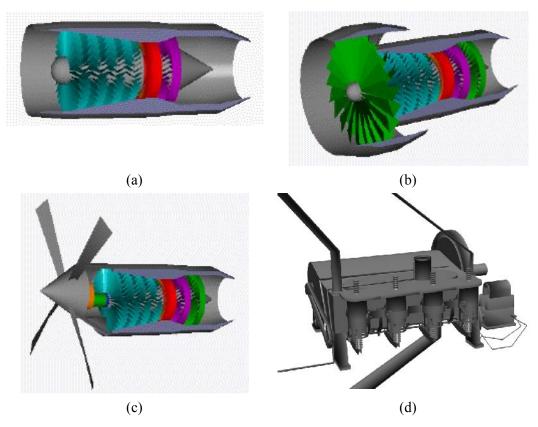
Aircraft engine types (a) turbojet, (b) turbofan, (c) turboprop and (d) internal combustion engine (piston engine).
